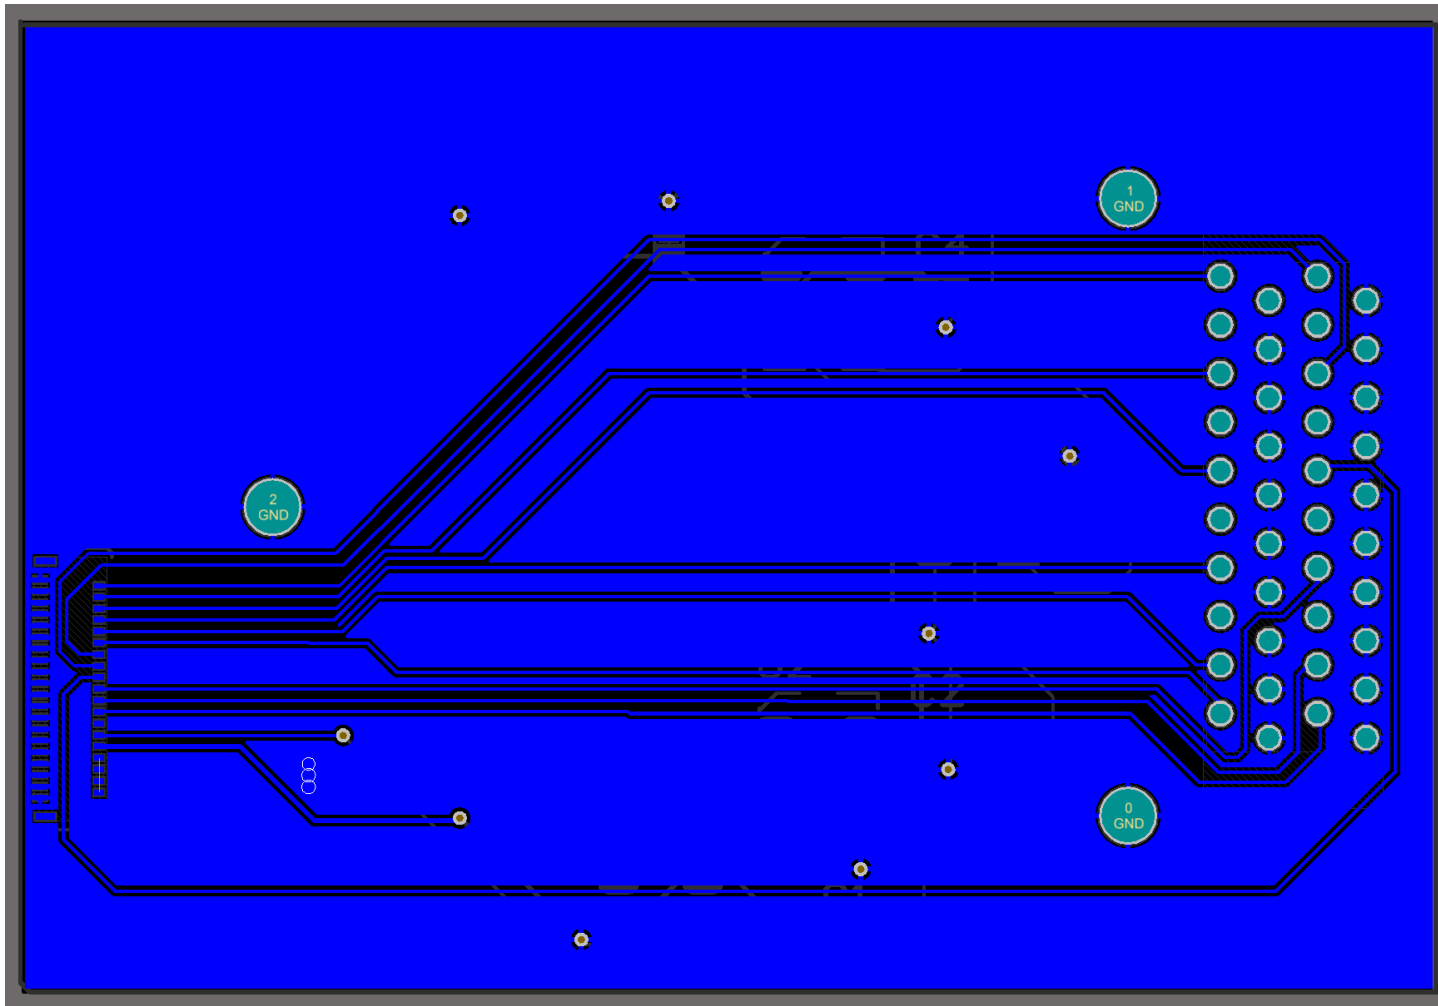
Sensor Board PCB, Altium Rear View (LEDS-section)
